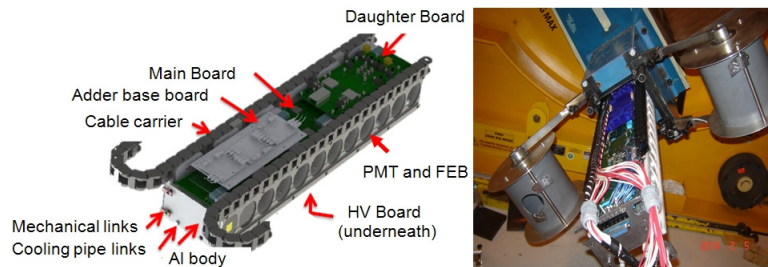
Mini-drawer design (left), Demonstrator and manipulation tooling (right).
